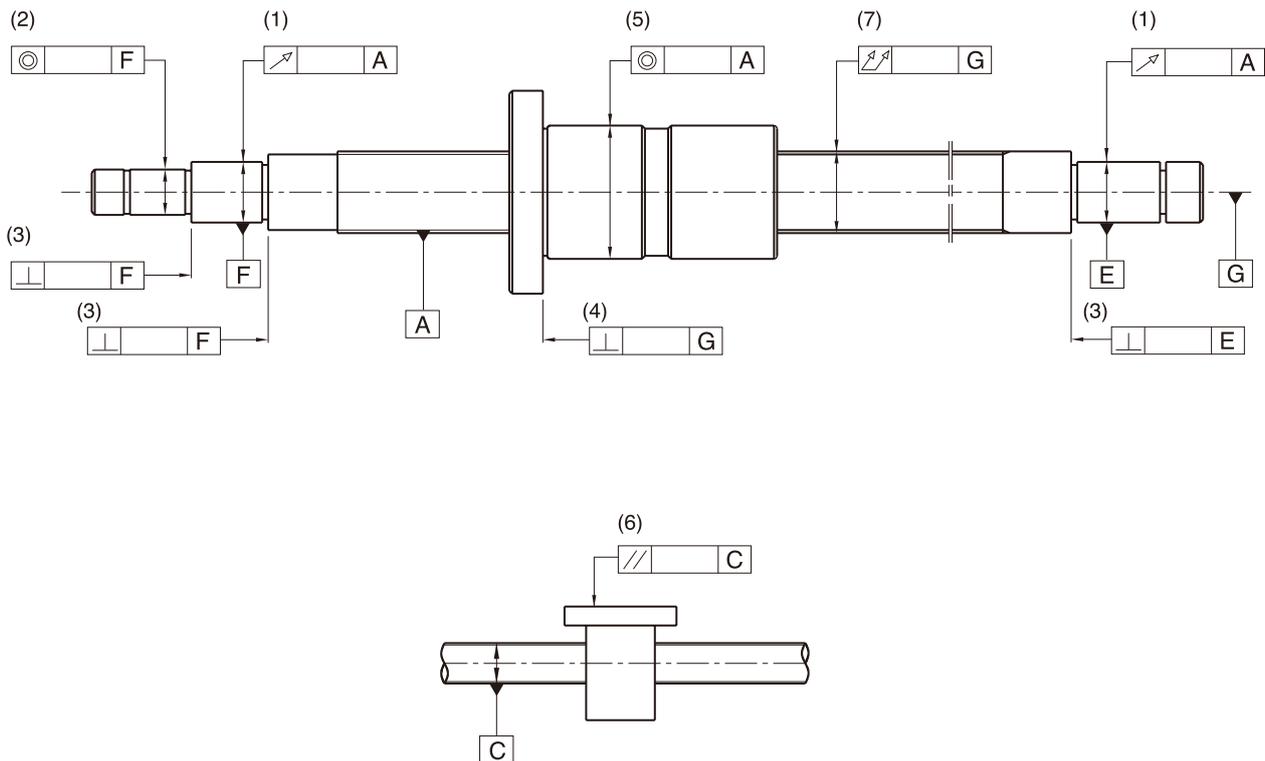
Mounting Accuracy and Tolerances
